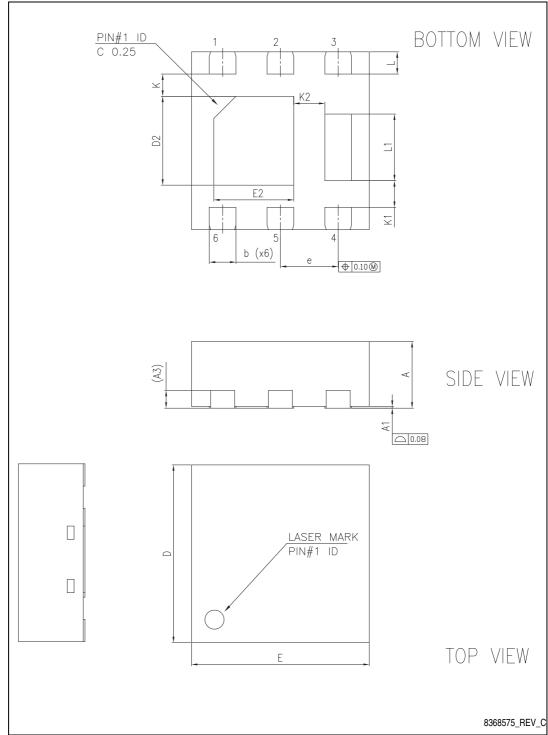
Drawing dimension PowerFLAT™ 2 x 2
